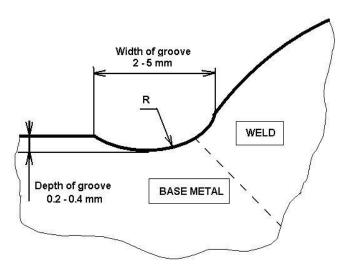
Profile of weld toe improved by Ultrasonic Peening [19]
